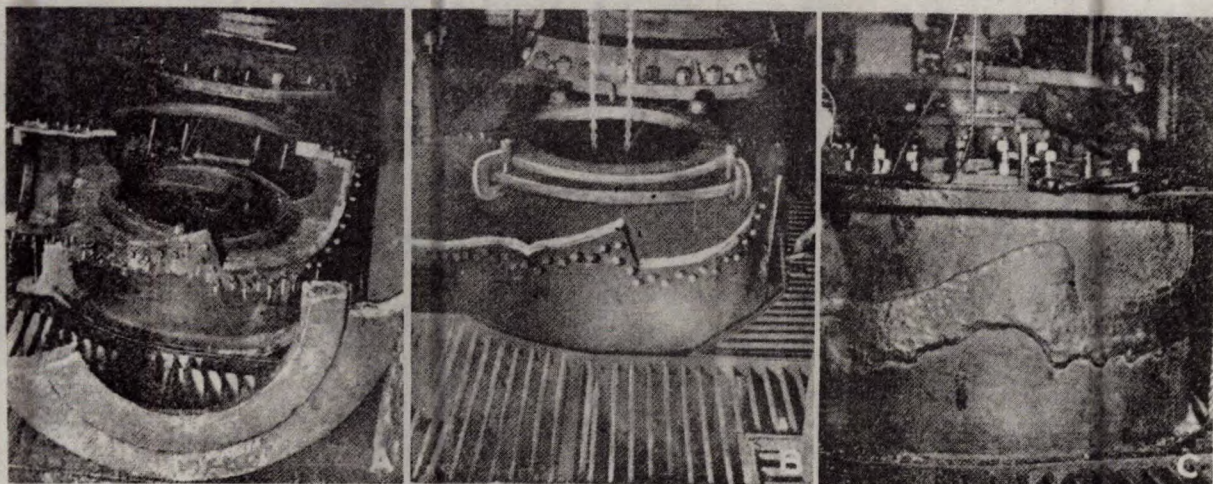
Repair by welding of first intermediate cylinder in one of sabotaged German vessels, 1919. The U.S.S. "Pocahontas", formerly Prinzess Irene. (Reference 15, p.133)
